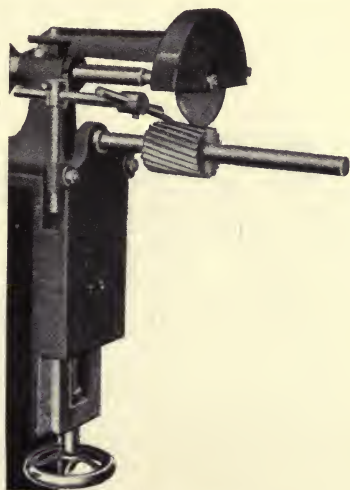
SHARPENING PARALLEL CUTTER—LUD. LOEWE
